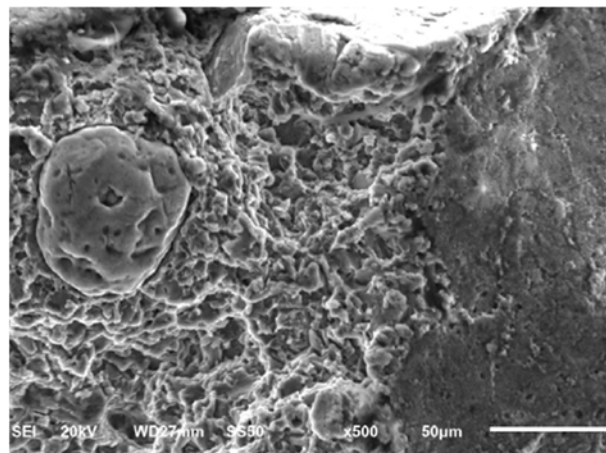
Fractography of the porosity defect of fracture initiation region.
